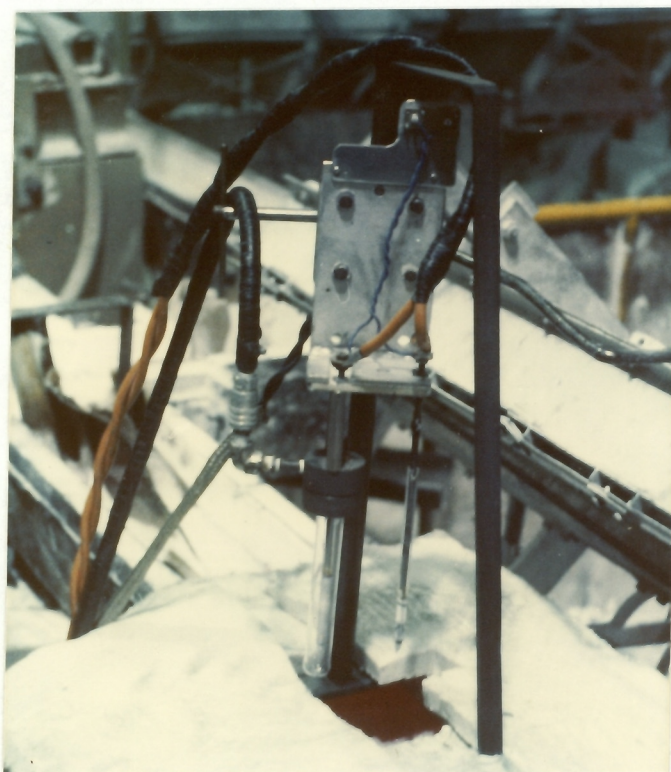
The metal sampling cell, cell holder assembly and support jig used to sample aluminium directly from metal transfer launders.
